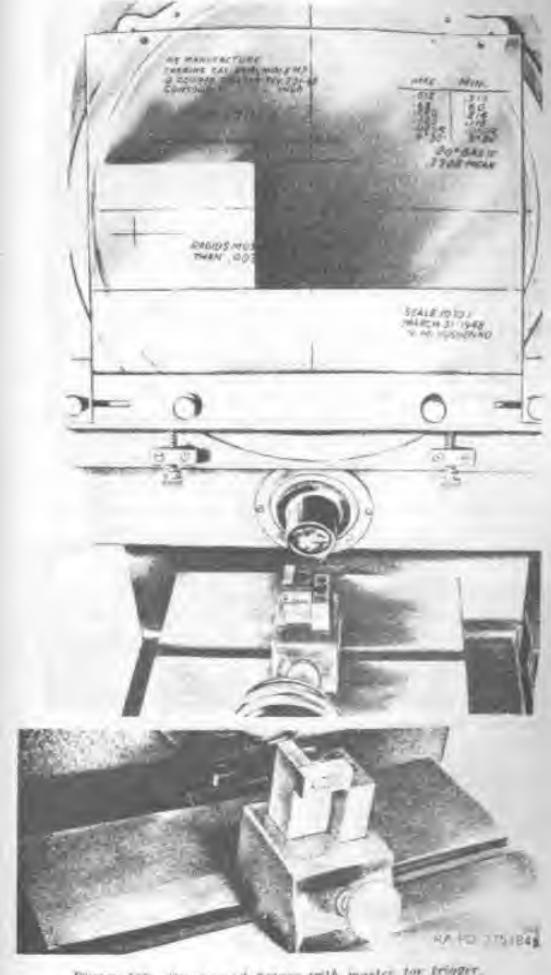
Screen and fixture set-up for trigger inspection.
